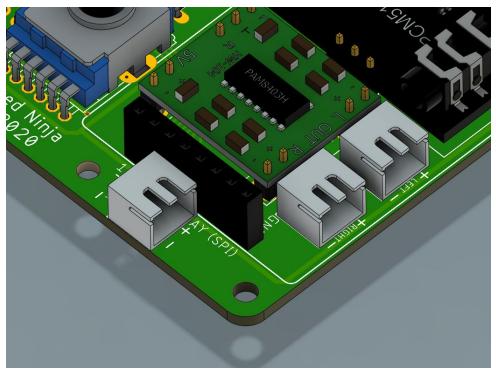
Toby PCB. Angled side view with soldered 1x8 pin female header.
